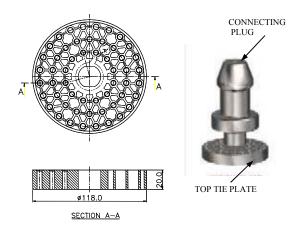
Top Tie Plate Assembly for 54-rod Cluster.
